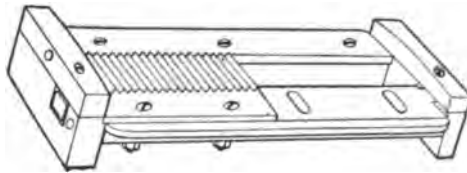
PUTSCH Dovetail Extremity Blade Holder.
